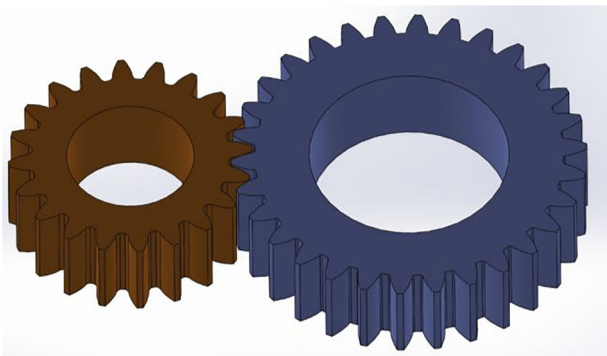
The CAD model of a gear pair ( $z_1=20$ ,  $z_2=30$ ,  $max=6$  mm,  $\alpha_w=23^\circ$ , Gear drive IV)
